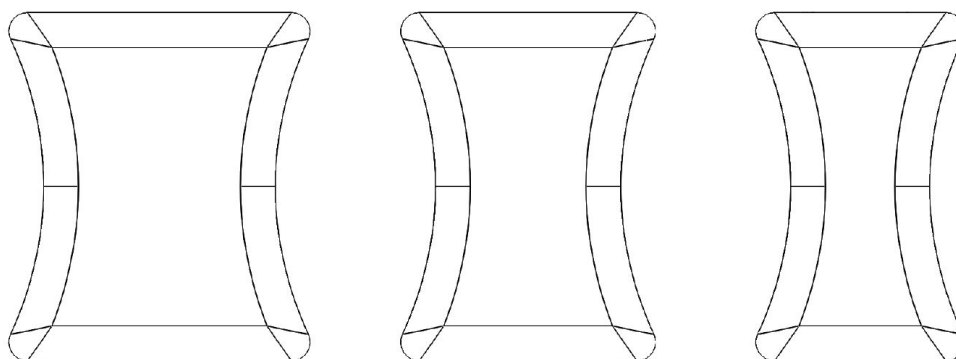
Additional Equipment: Three examples of Spacer Cushion sizes
